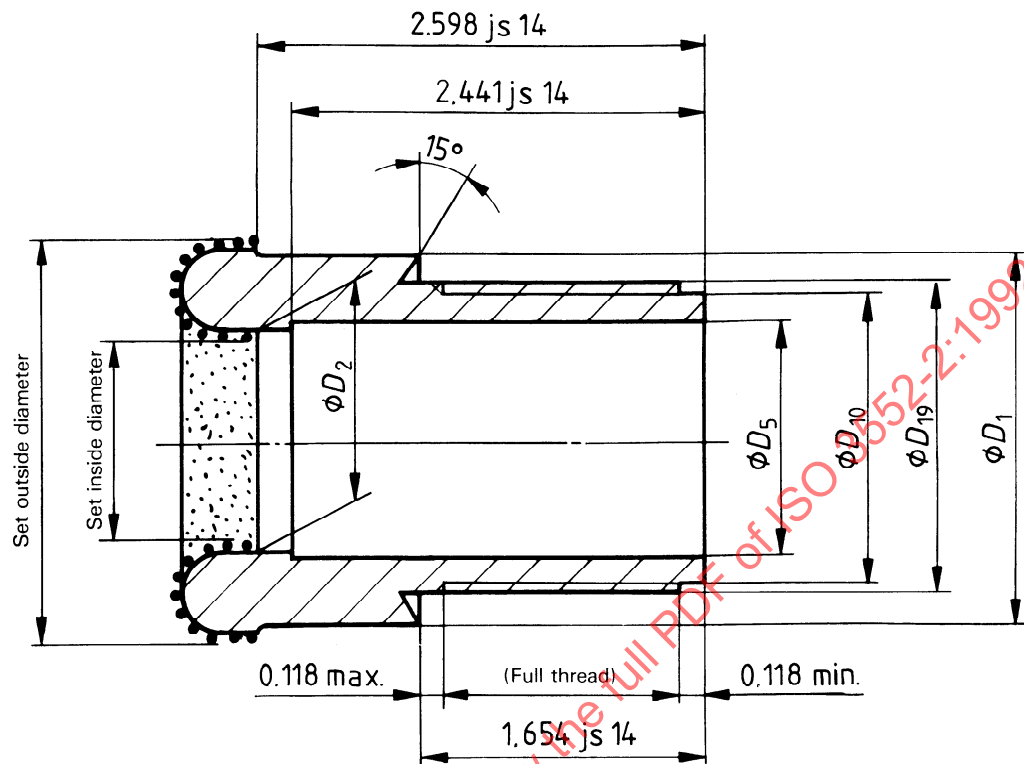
Core barrel, Type Z — Bit (see table 25)
